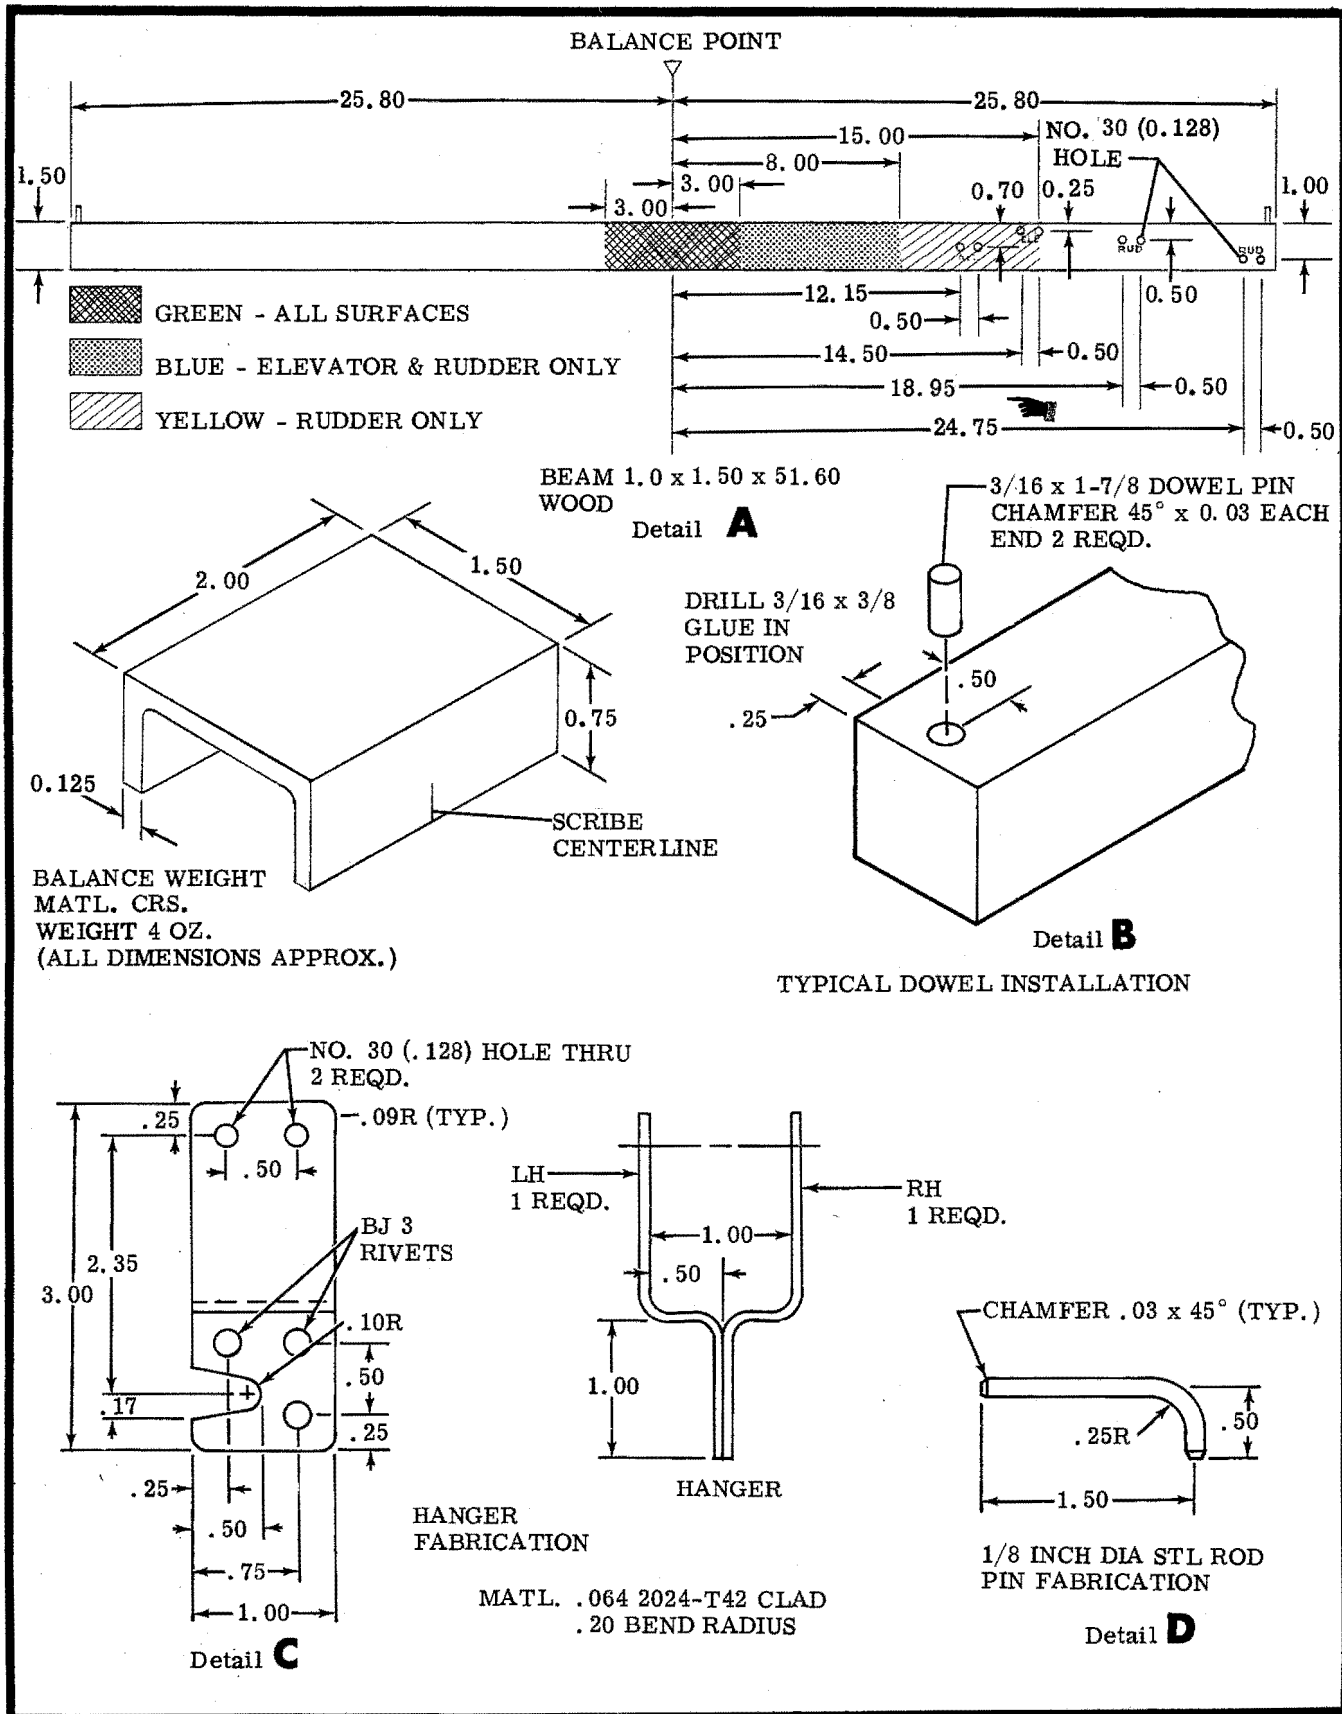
Balancing Fixture Fabrication. (Sheet 1 of 2)
